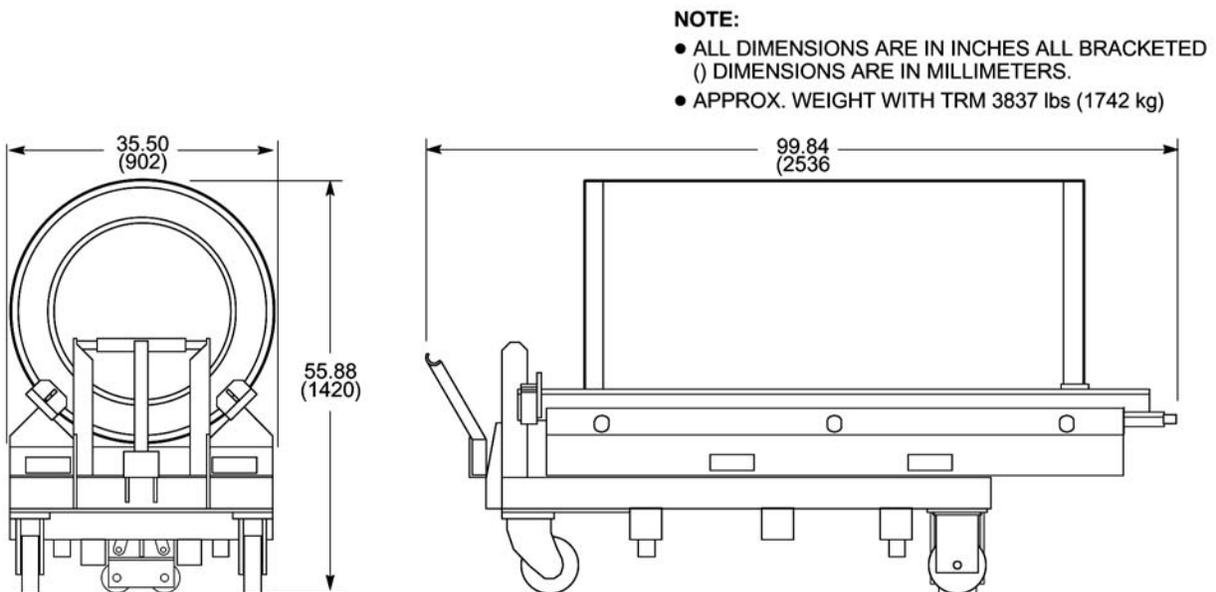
Short Room Replacement TRM Gradient Coil Assembly & Cradle On Cart
